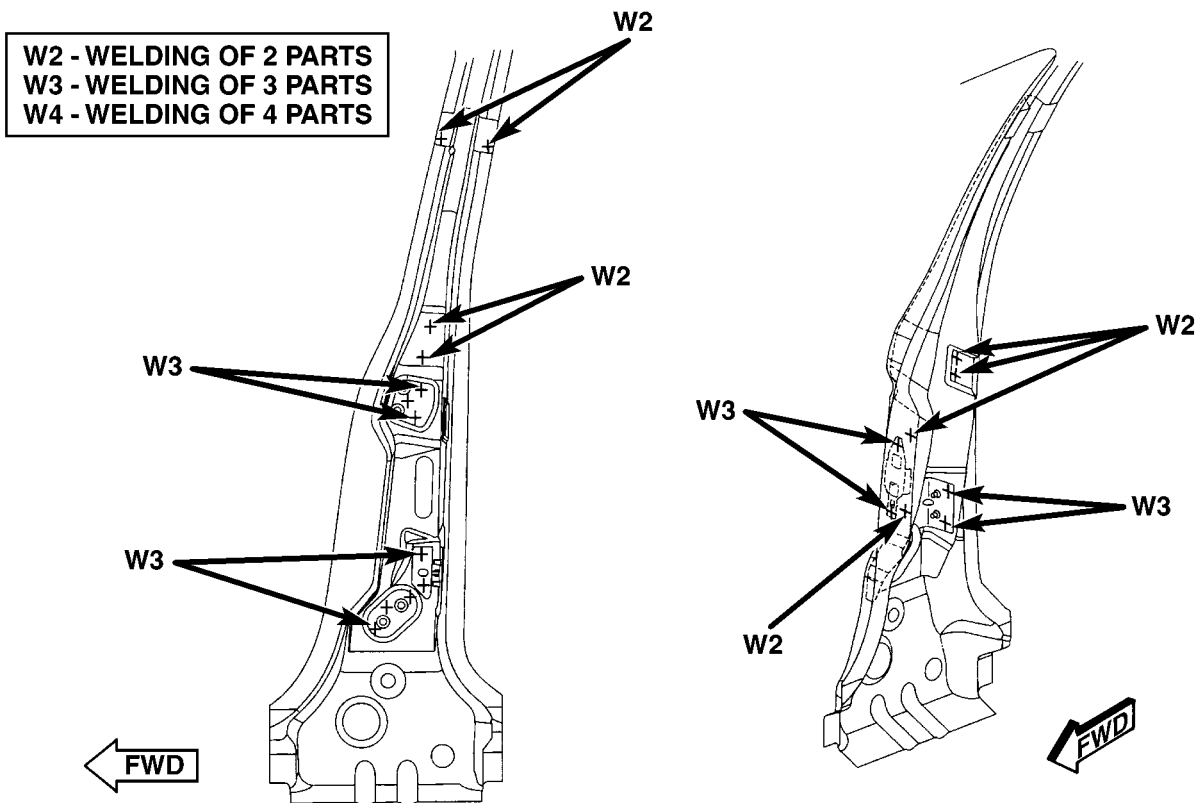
TAPPING PLATES, RETAINER & REINFORCEMENT TO CENTER PILLAR REINFORCEMENT
